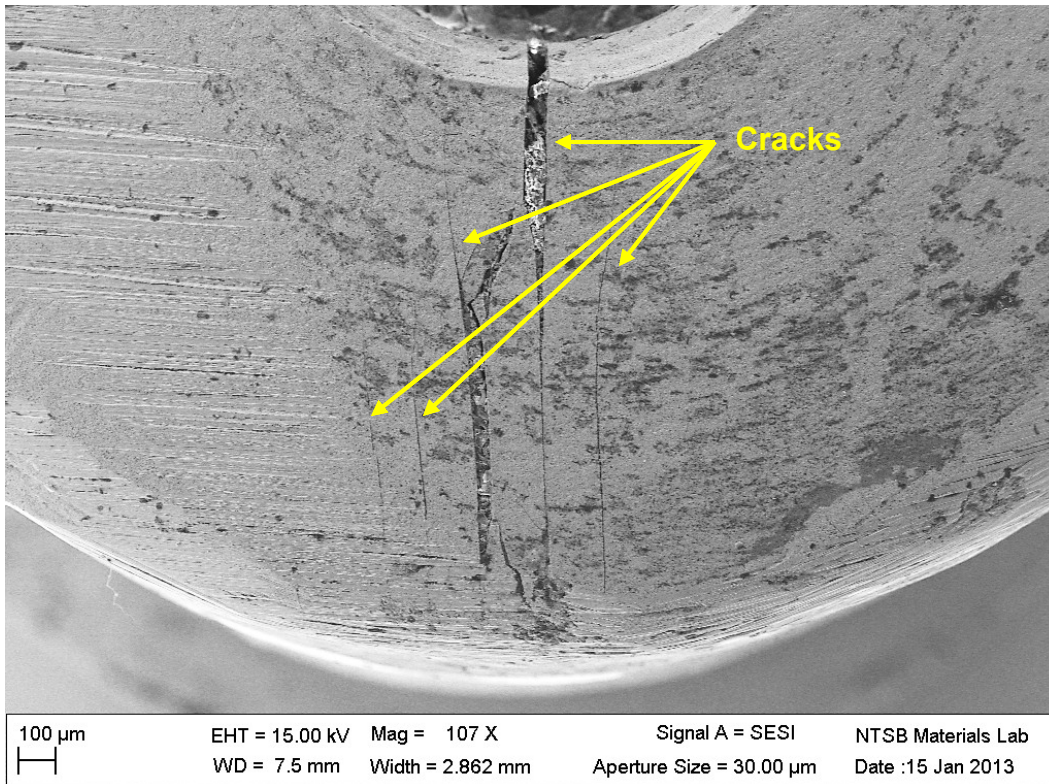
Secondary electron (SE) micrograph of cracks on the face of the output gearshaft.
